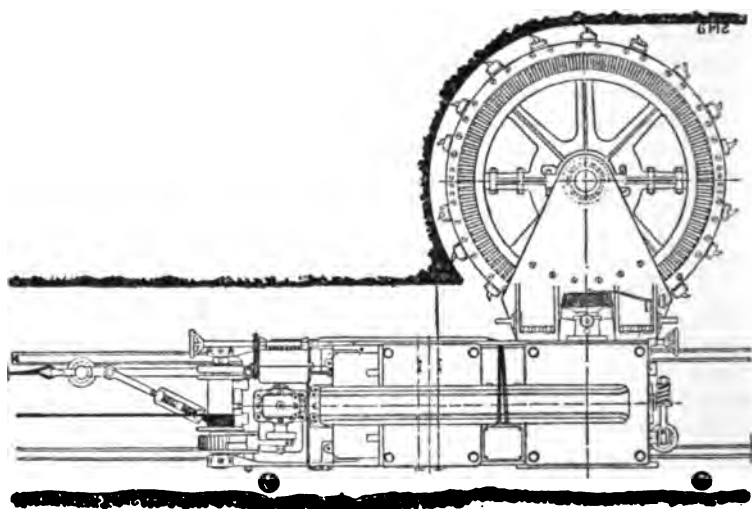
Horizontal Section showing the Action of a Disc Coal-cutting Machine.
